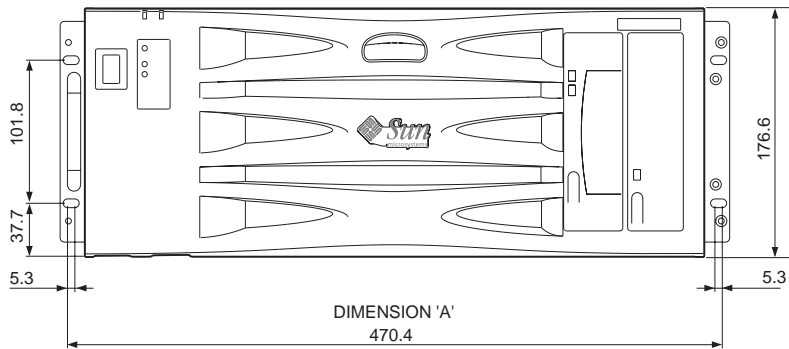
Netra T4 System Dimensions and Mounting Options (dimensions in mm)
